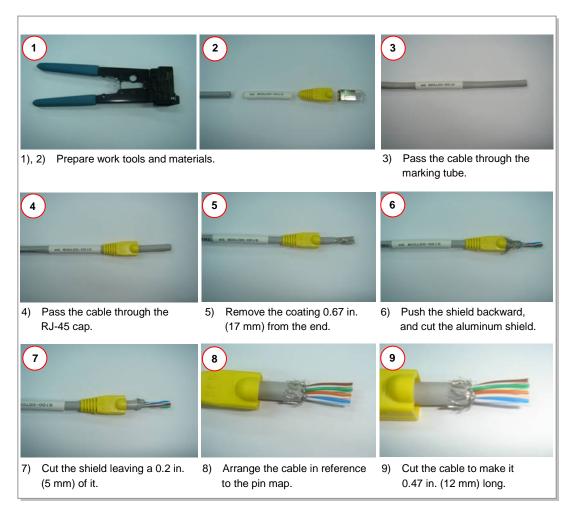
Assembling the RJ-45 Connector (Shield Type) (1)
